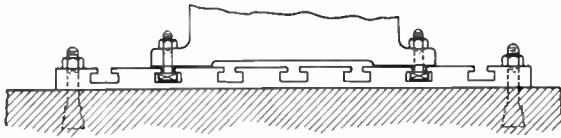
THE TEST MACHINE BOLTED TO THE TEST BED. The bolts are slid into position from the edge of the bed.
